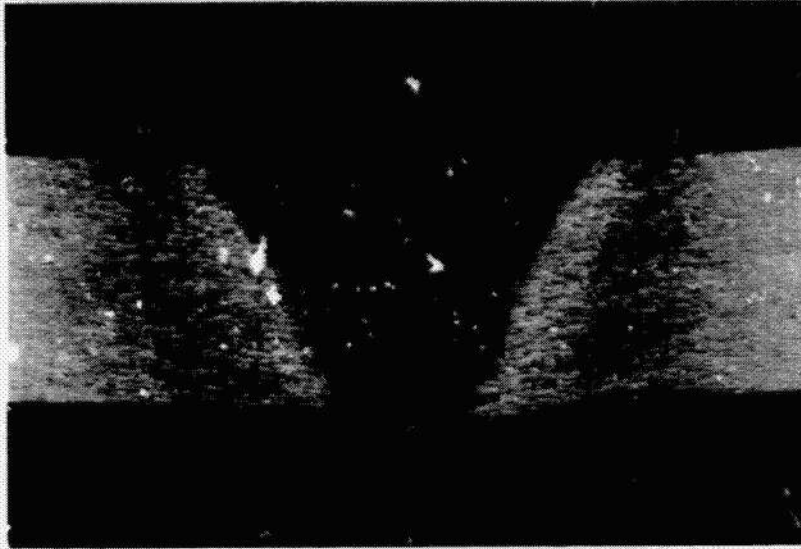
TIG weld fracture-heat sinked (x5).
